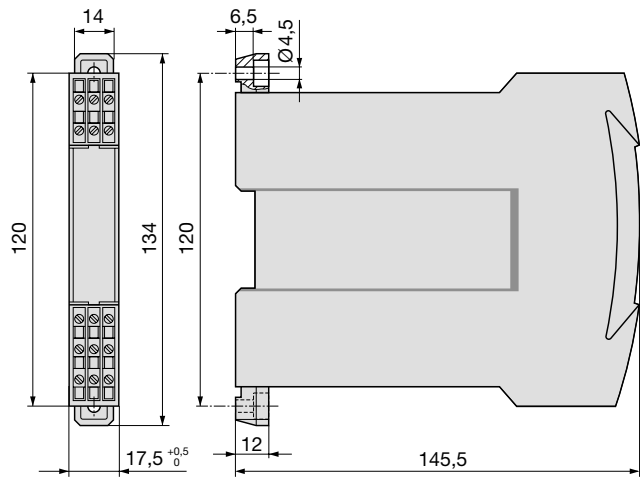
SINEAX B 811 in housing S17 screw hole mounting brackets pulled out.
